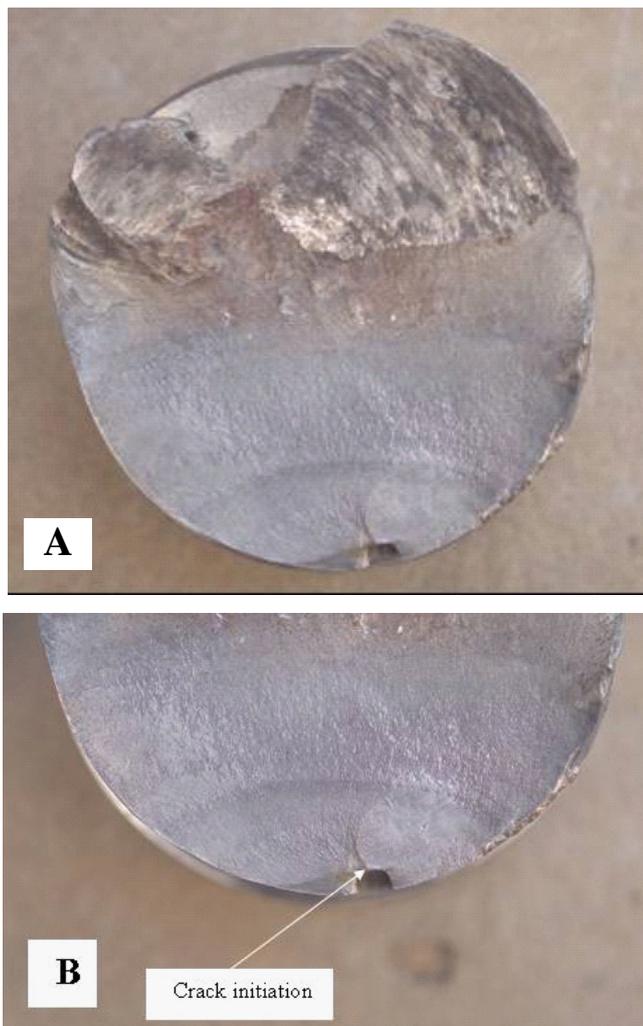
Closer views (A and B) of a face of the fractured shaft.
